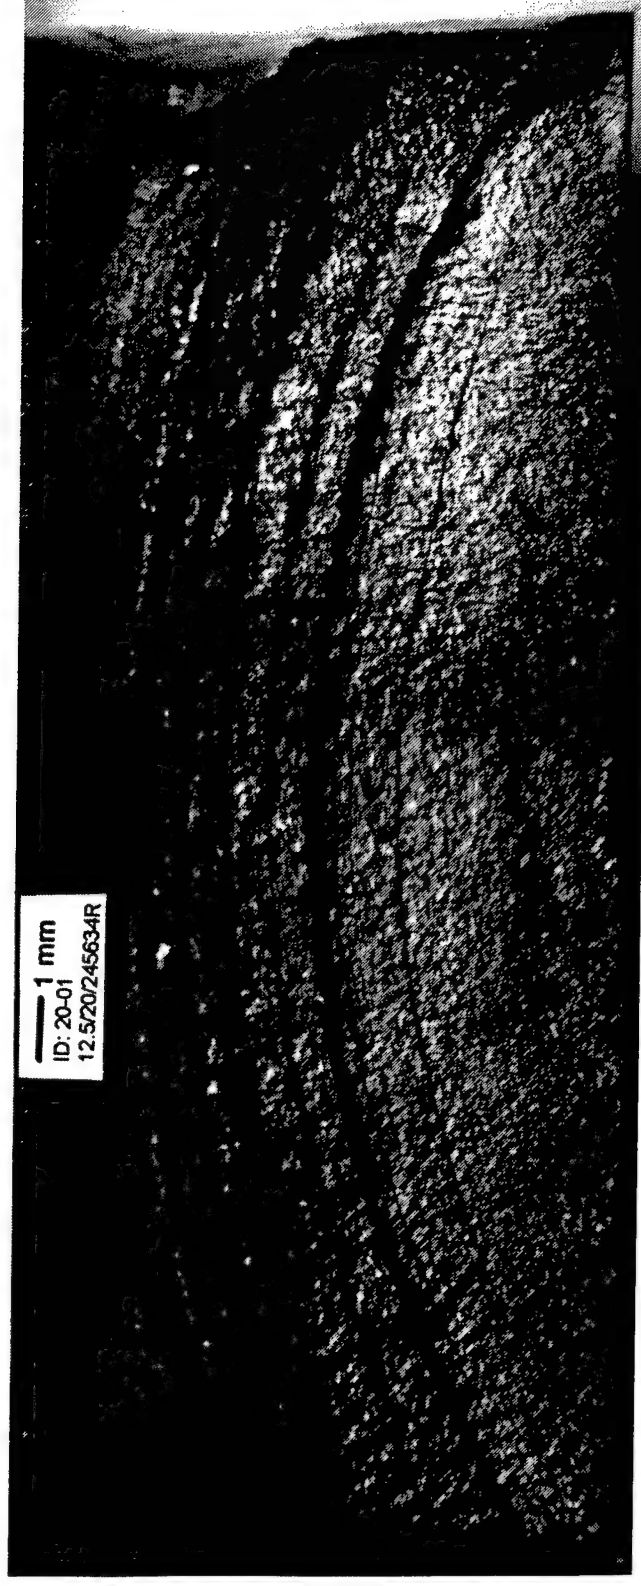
Fatigue fracture surface of the HSLA-80 but weld sample subjected to random loading:
